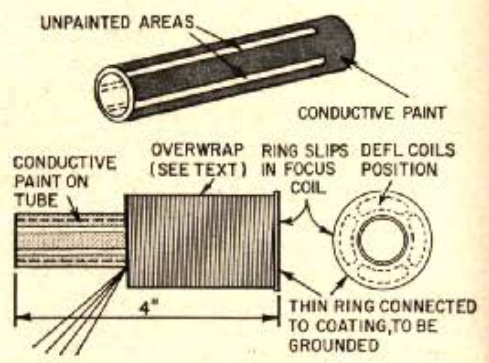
Conductive paint shields vidicon. Overwrap shields deflection coils.
